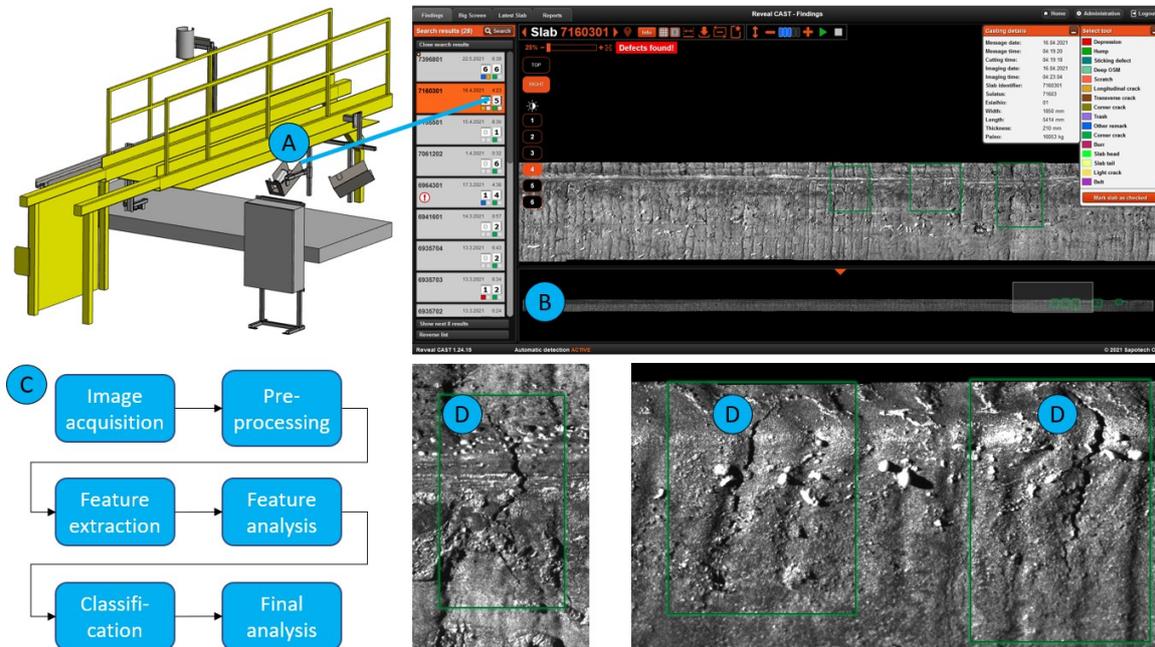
Configuration of slab corner inspection and some detected corner cracks.
